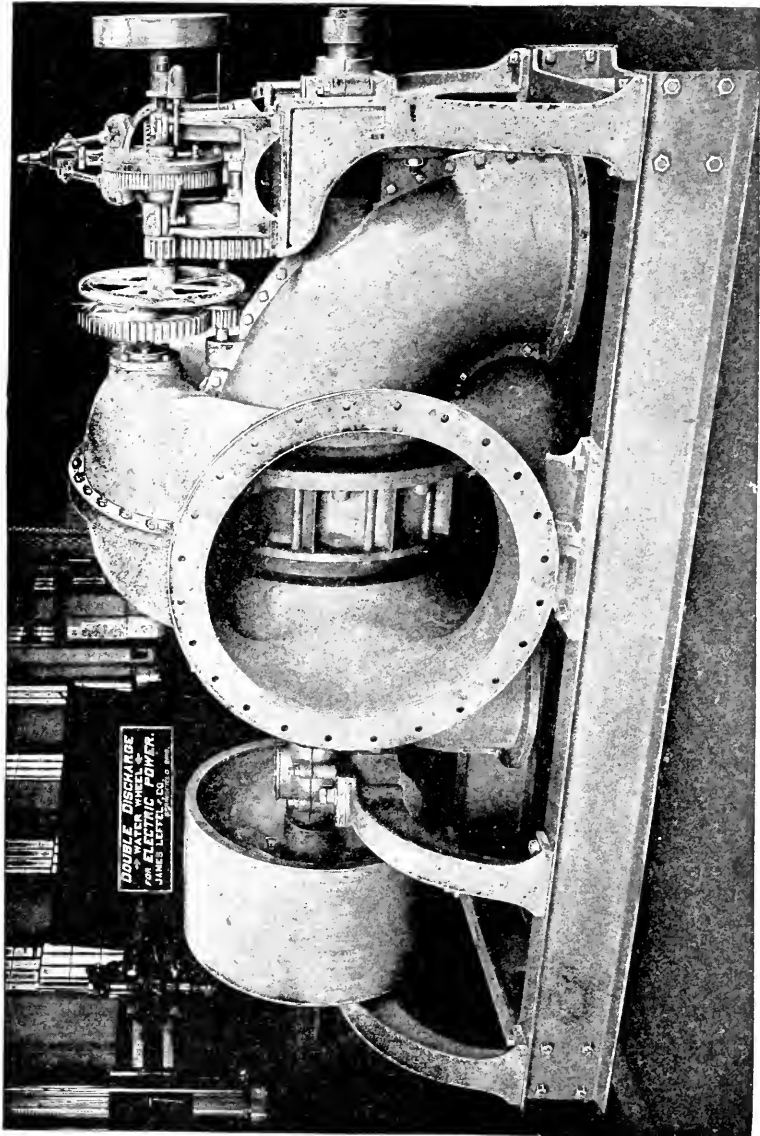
Double-Discharge, Horizontal-Shaft Turbine with Globe Casing.
